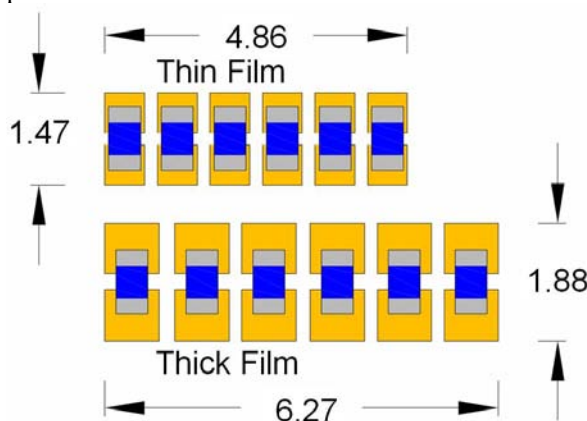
Size reduction for 0402 devices due to implementation of thin film on LTCC. Top row is thin film, bottom row thick film solution. Dimensions are in mm.
